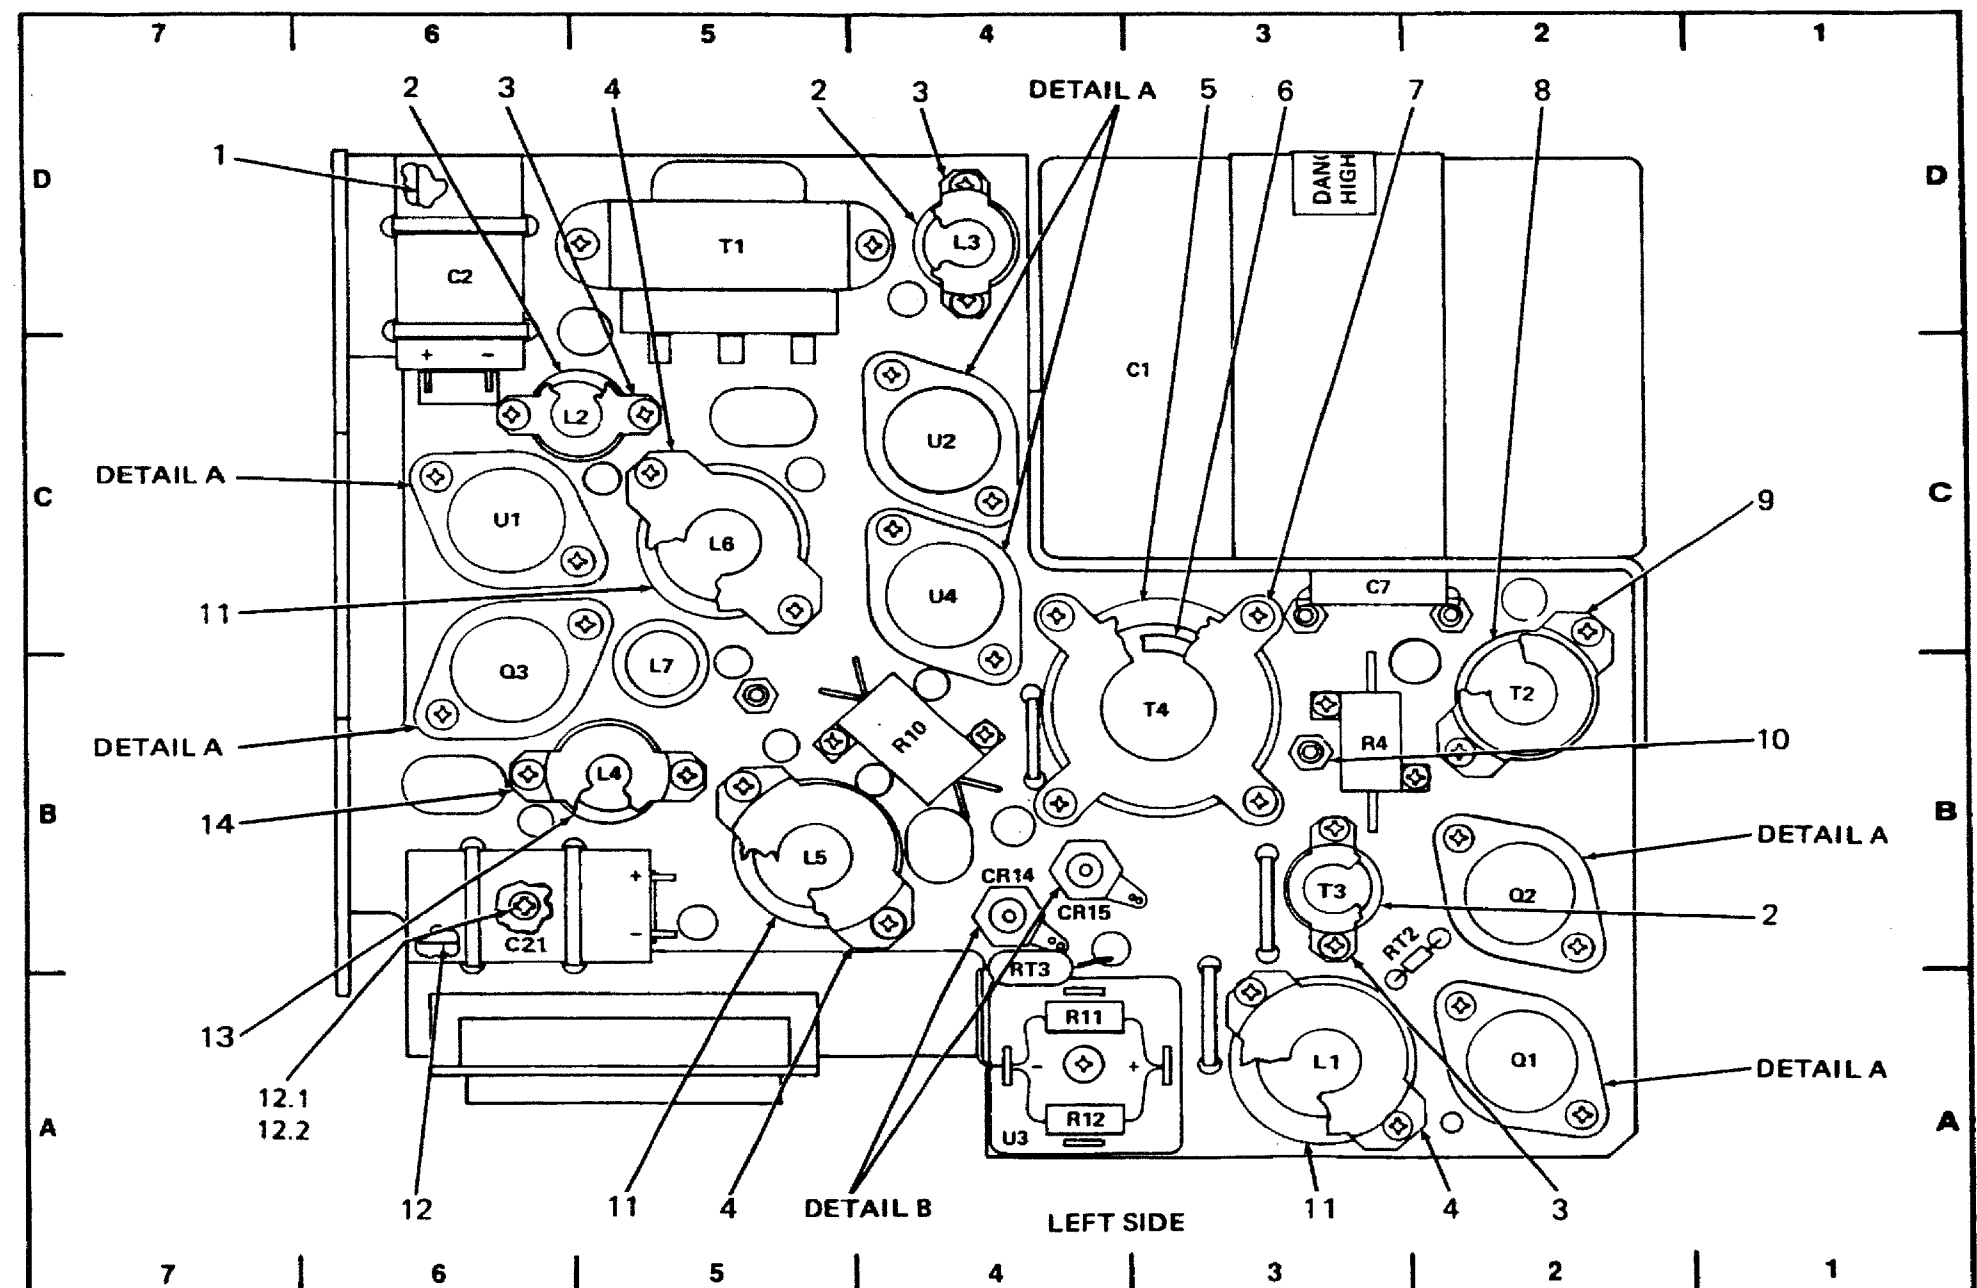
Power Supply Heat Sink Assembly (Sheet 1 of 4)
